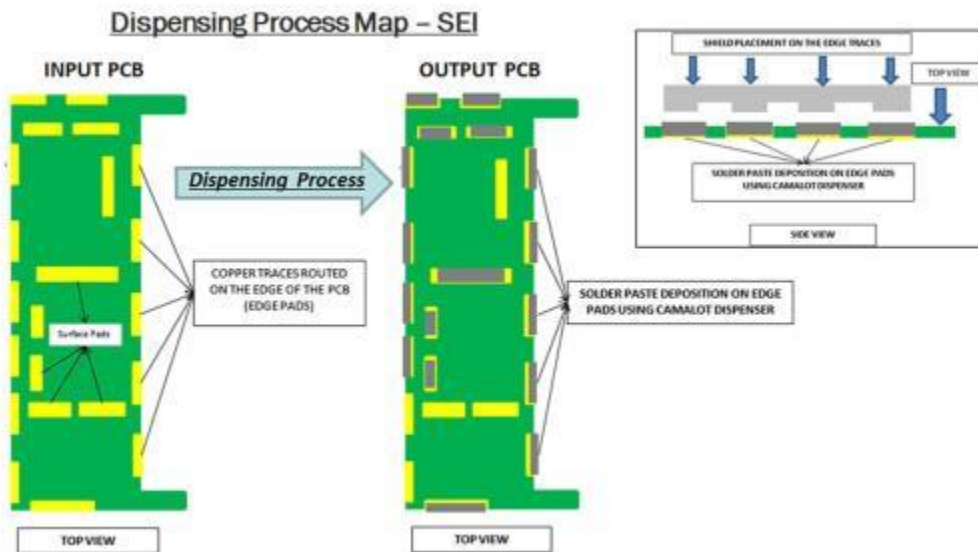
Shield Edge Interconnects (SEI) Process with Solder Paste Deposited on PCB.
